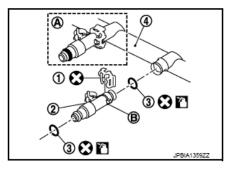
Assembled And Disassembled Views Of Fuel Injector Courtesy of NISSAN MOTOR CO., U.S.A.
